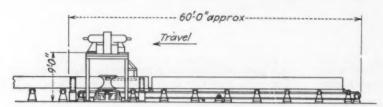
Details of the arrangement for OD welding are shown here. Welding is by submerged melt process.
